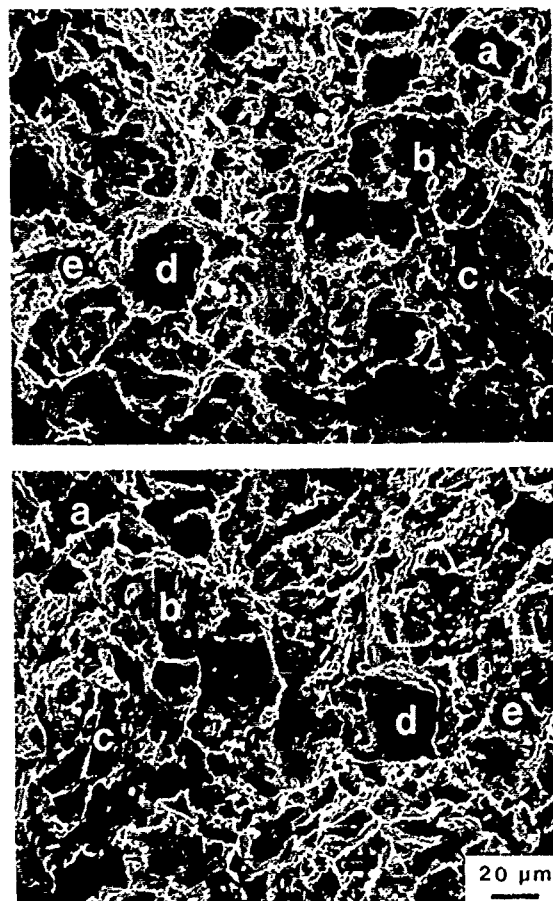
Matching fracture surfaces of the particulate-reinforced composite.
